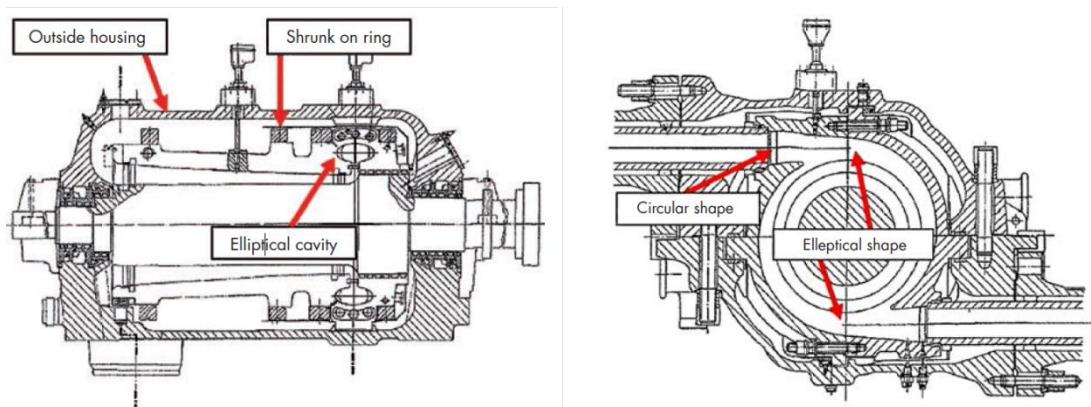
Left: Side view of turbine housing. Right: Lateral view of turbine housing
